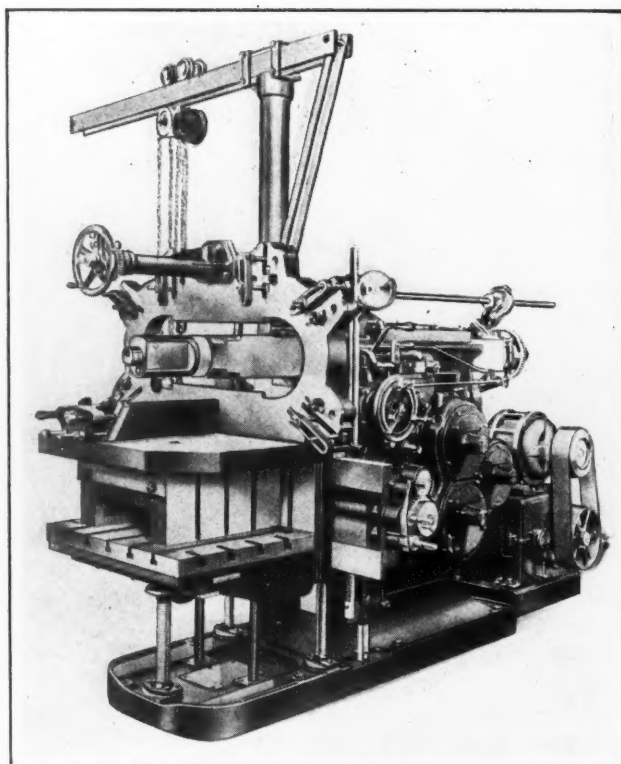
Morton Special Railroad Shaper Equipped with Improved Double Chuck
